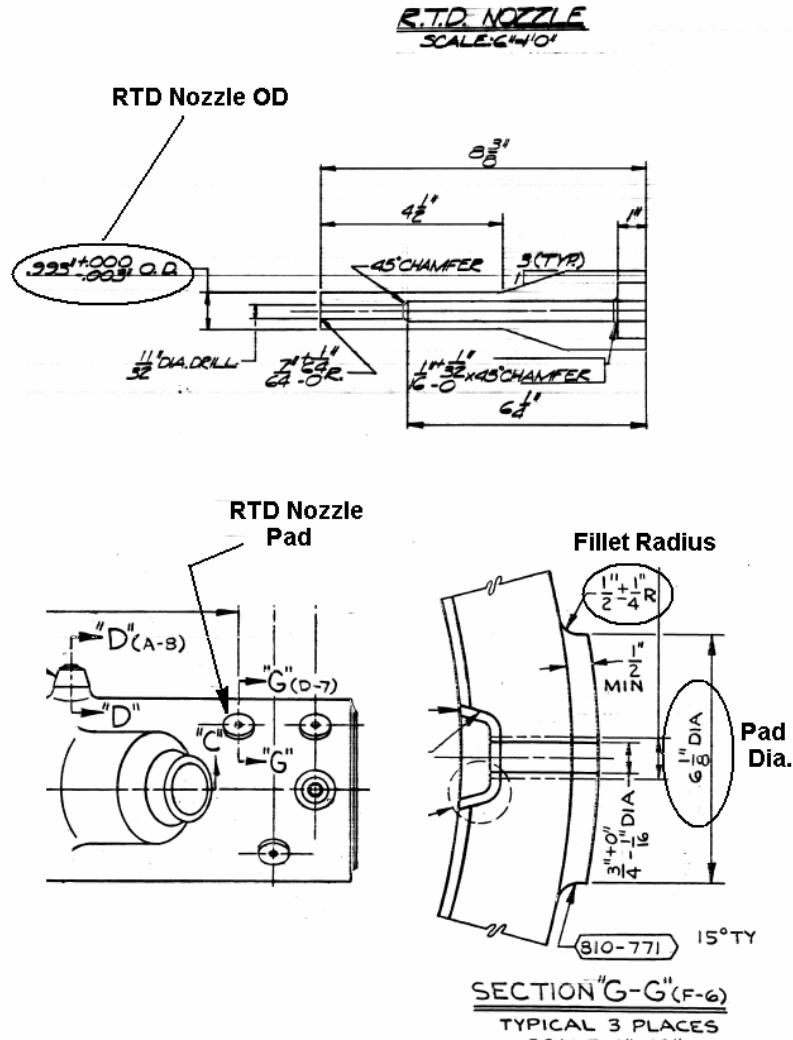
Sample RTD Nozzle Uninspectable and Obstruction Dimensions
